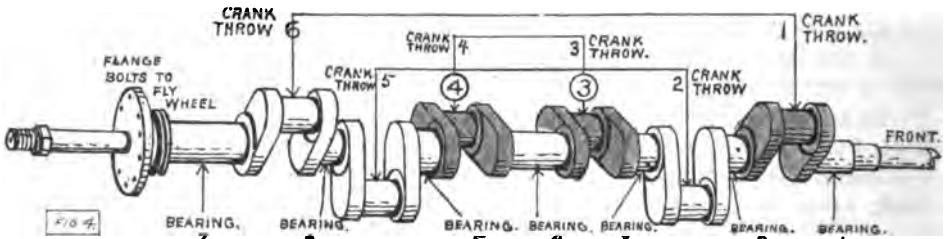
A solid crank shaft, with seven bearings. Six cylinder.
